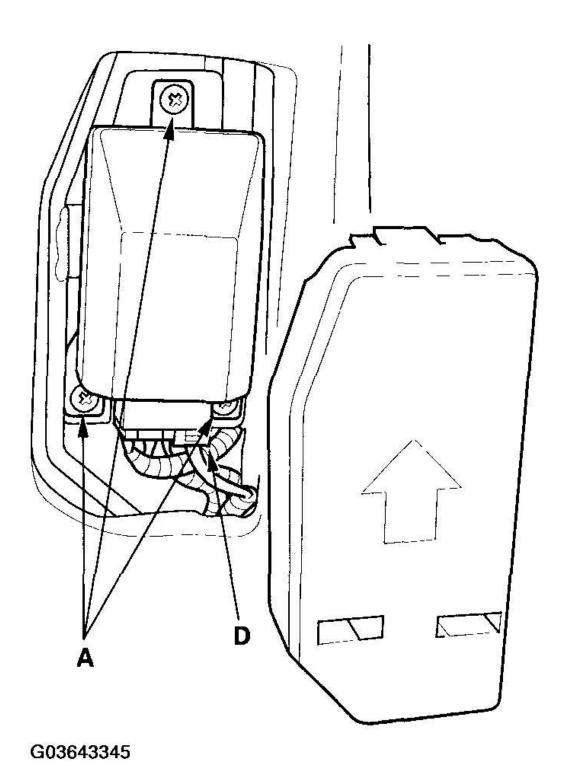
Connecting OPDS Unit Harness 8P Connector D And Sensor Connector To OPDS Unit
